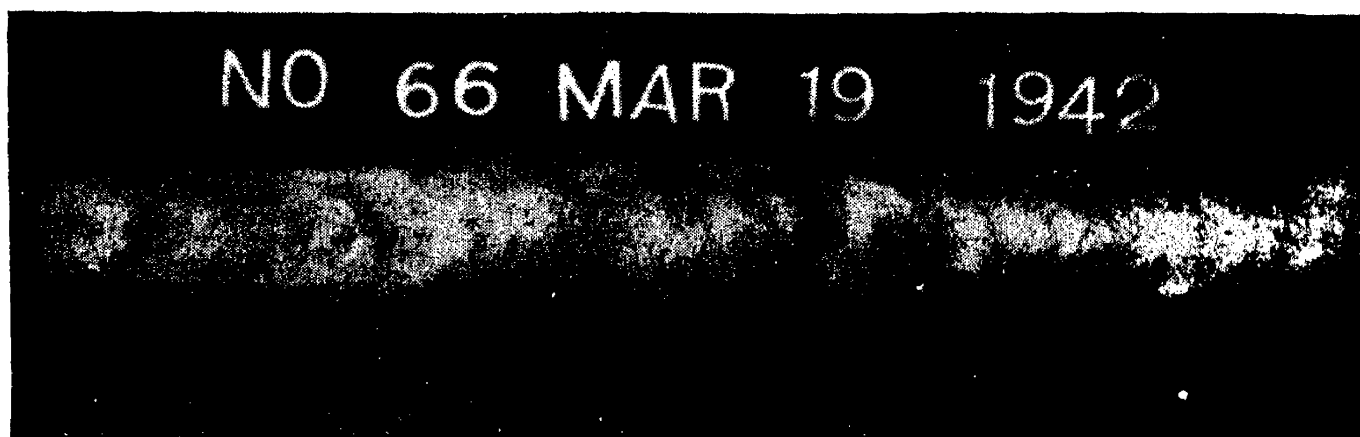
Porosity in butt weld in 1-in. steel plate.
